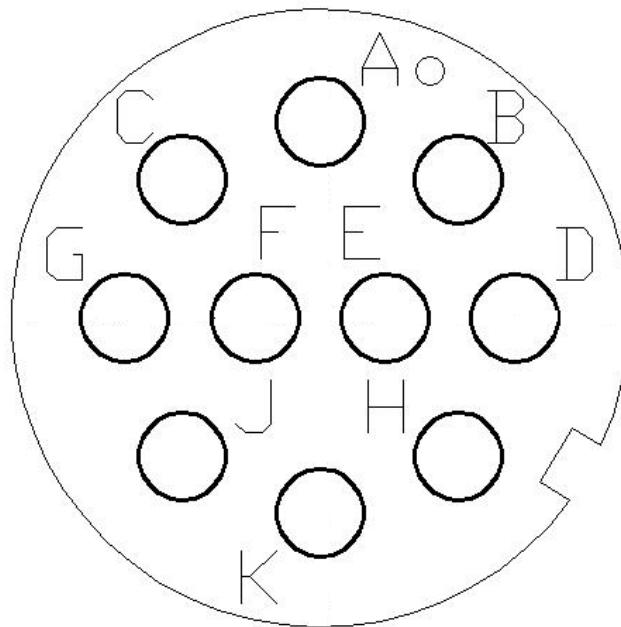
Inverter Box CN1 Connector Layout Drawing
